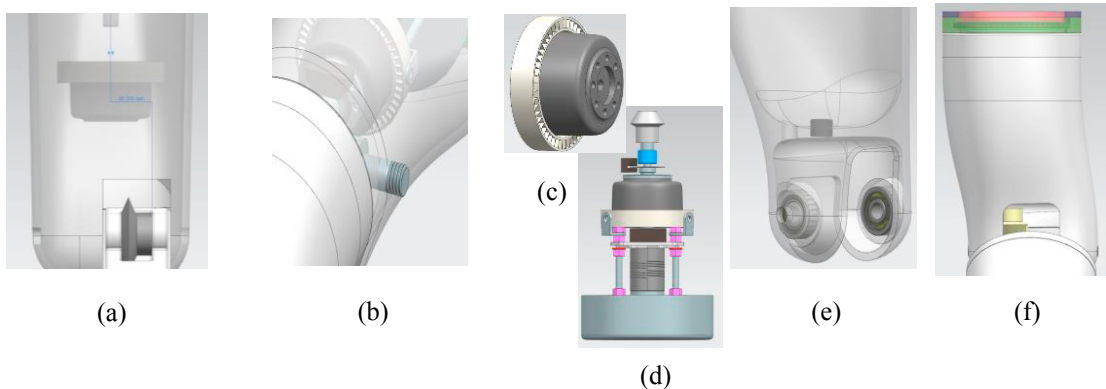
Examples of 3D models of parts and components for the robot arm.
